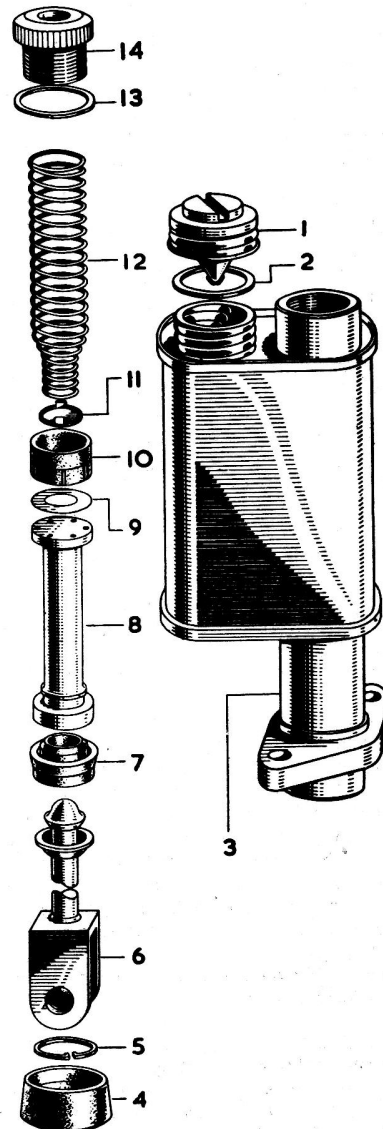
EXPLODED VIEW OF THE CLUTCH MASTER CYLINDER
